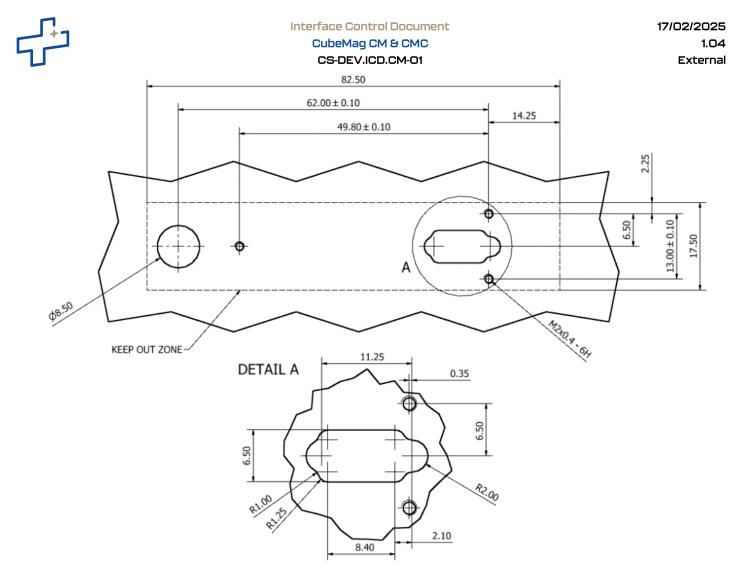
Panel Cut-Outs Required to Mount CubeMag Deployable
